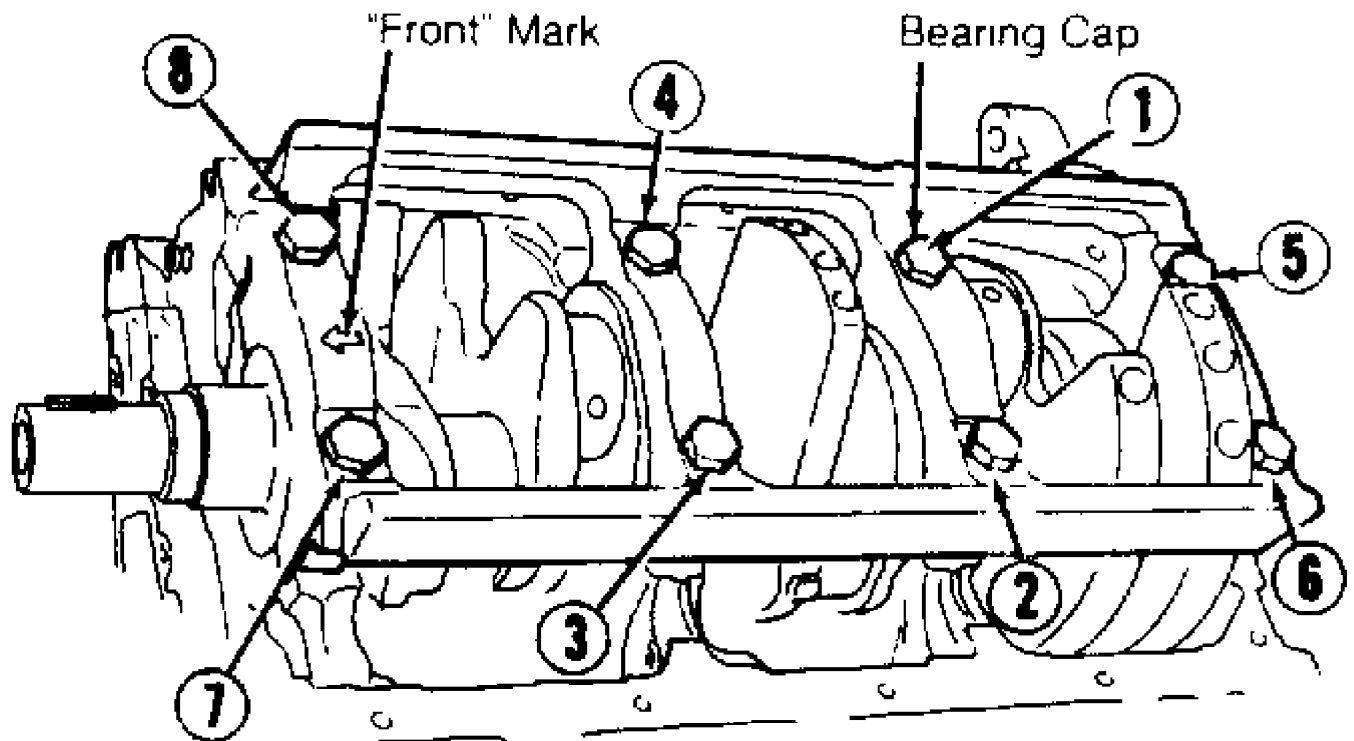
Main Bearing Cap Bolt Tightening Sequence
